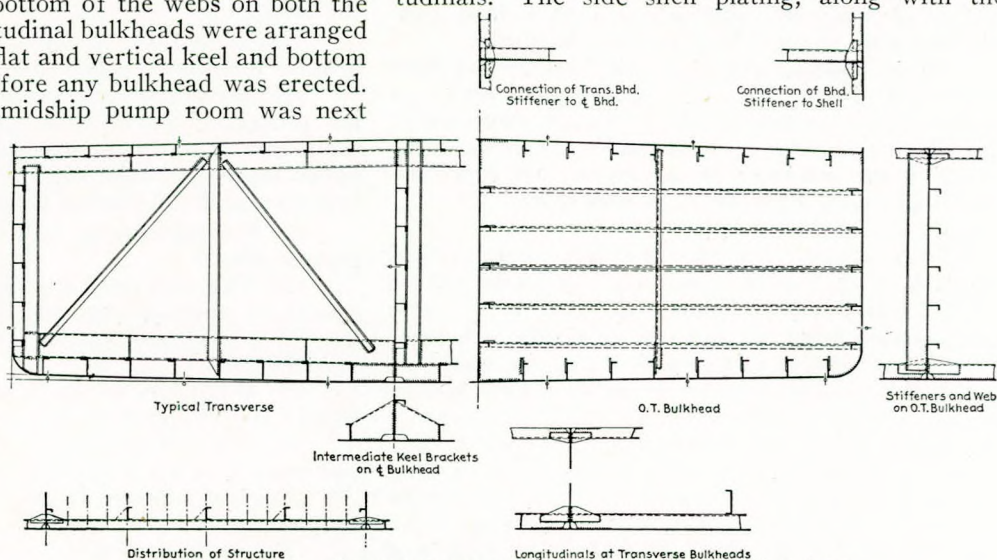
Suggested arrangement for welding small tankers.
